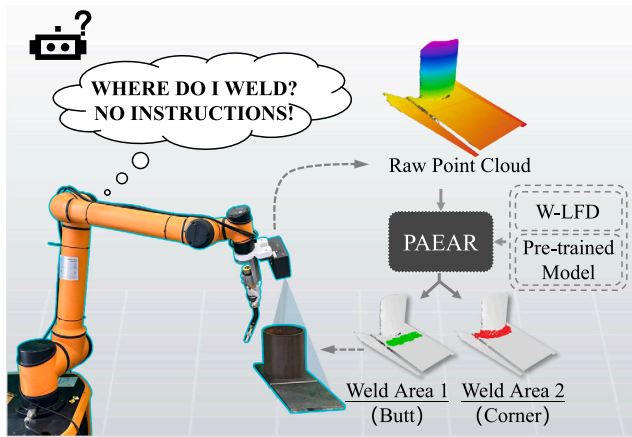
Challenges faced by welding robots in interpreting unfamiliar parts and schematic diagram of autonomous weld recognition and classification based on PAEAR.
